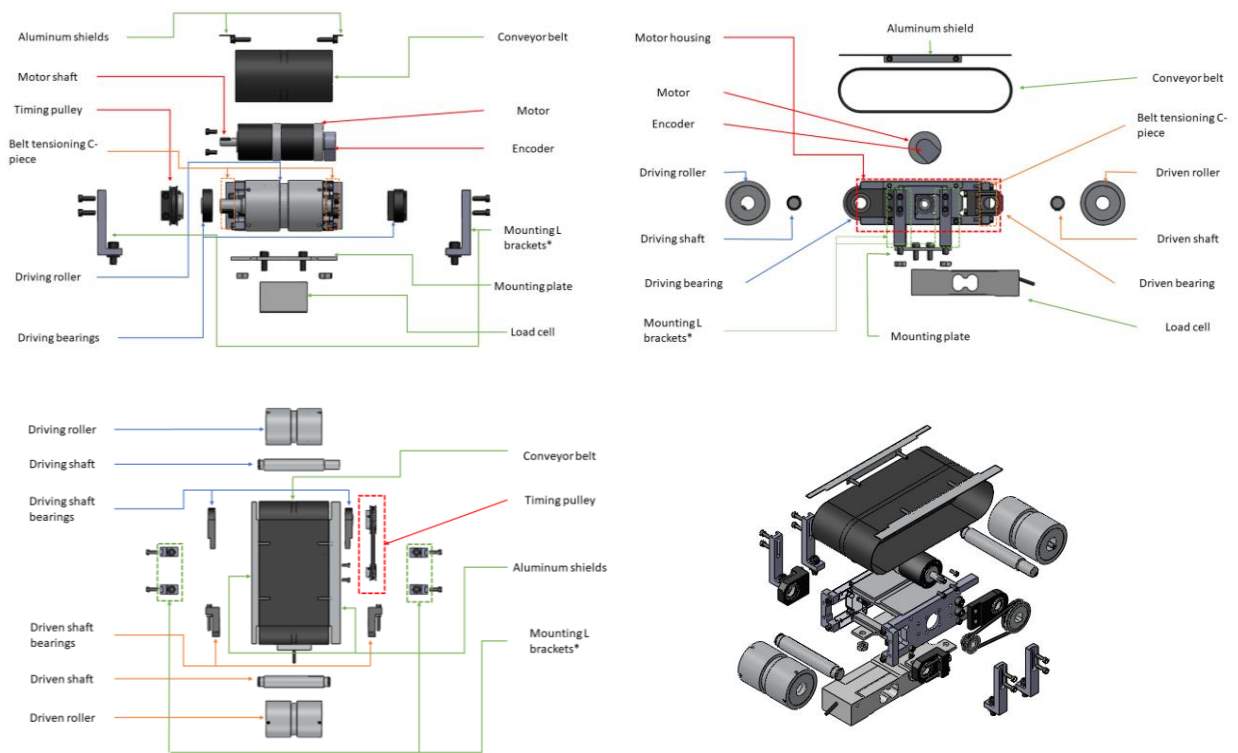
Exploded view of the CAD model of the conveyor unit to show individual parts
